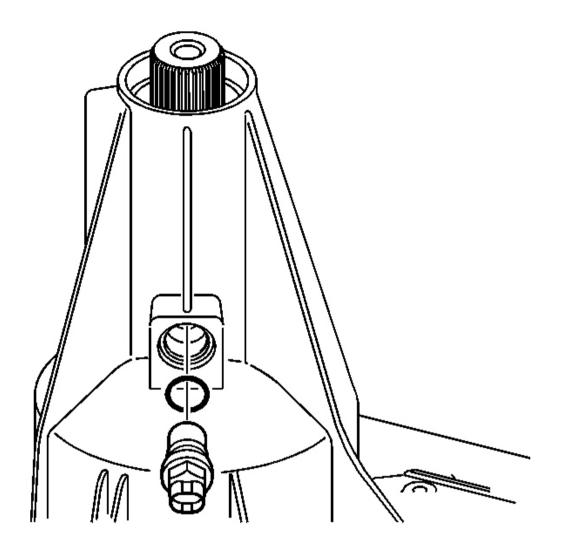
Installing Vehicle Speed Sensor With New O-Ring Seal Courtesy of GENERAL MOTORS CORP.
